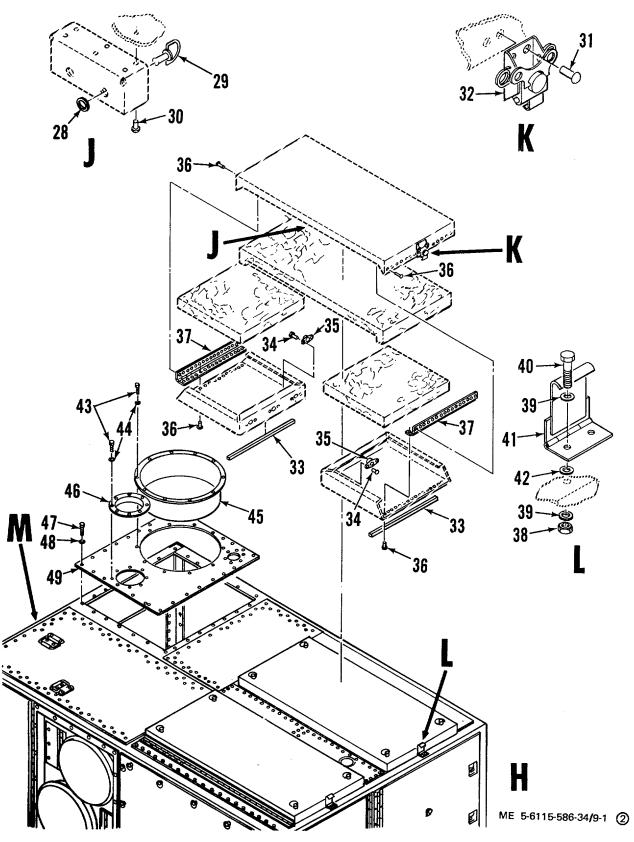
Enclosure assembly, exploded view. (sheet 2 of 10)
